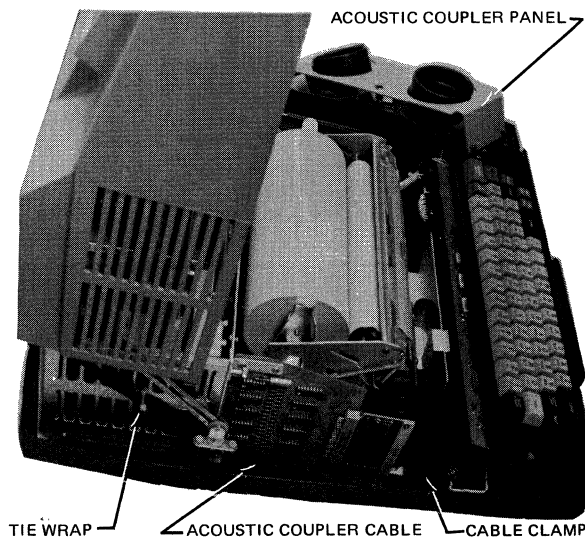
INSTALLING THE ACOUSTIC COUPLER PANEL CABLE
